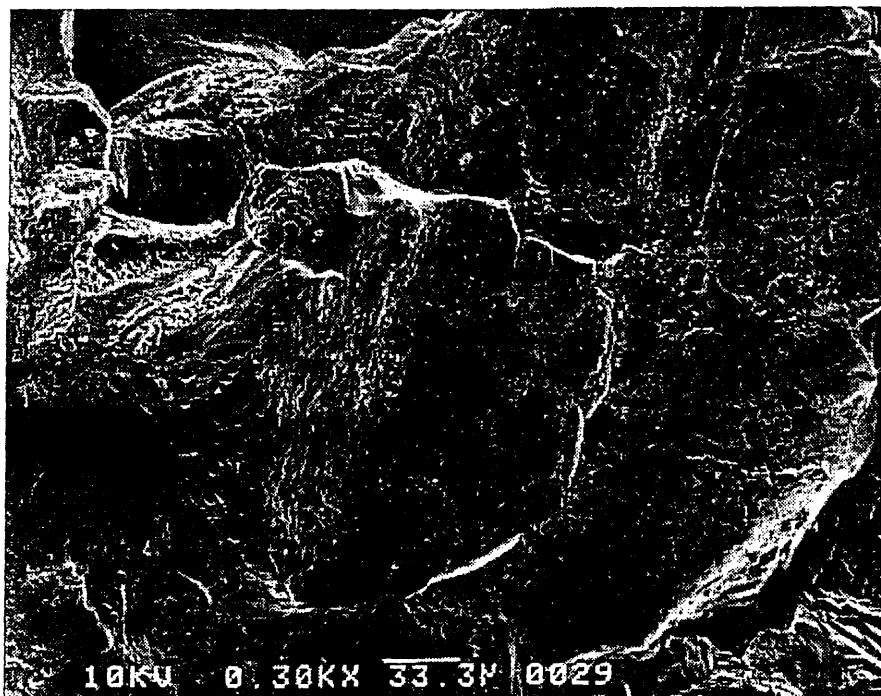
High magnification image of the intergranular fracture surface of specimen 2003, furnace sensitized alloy 304.
